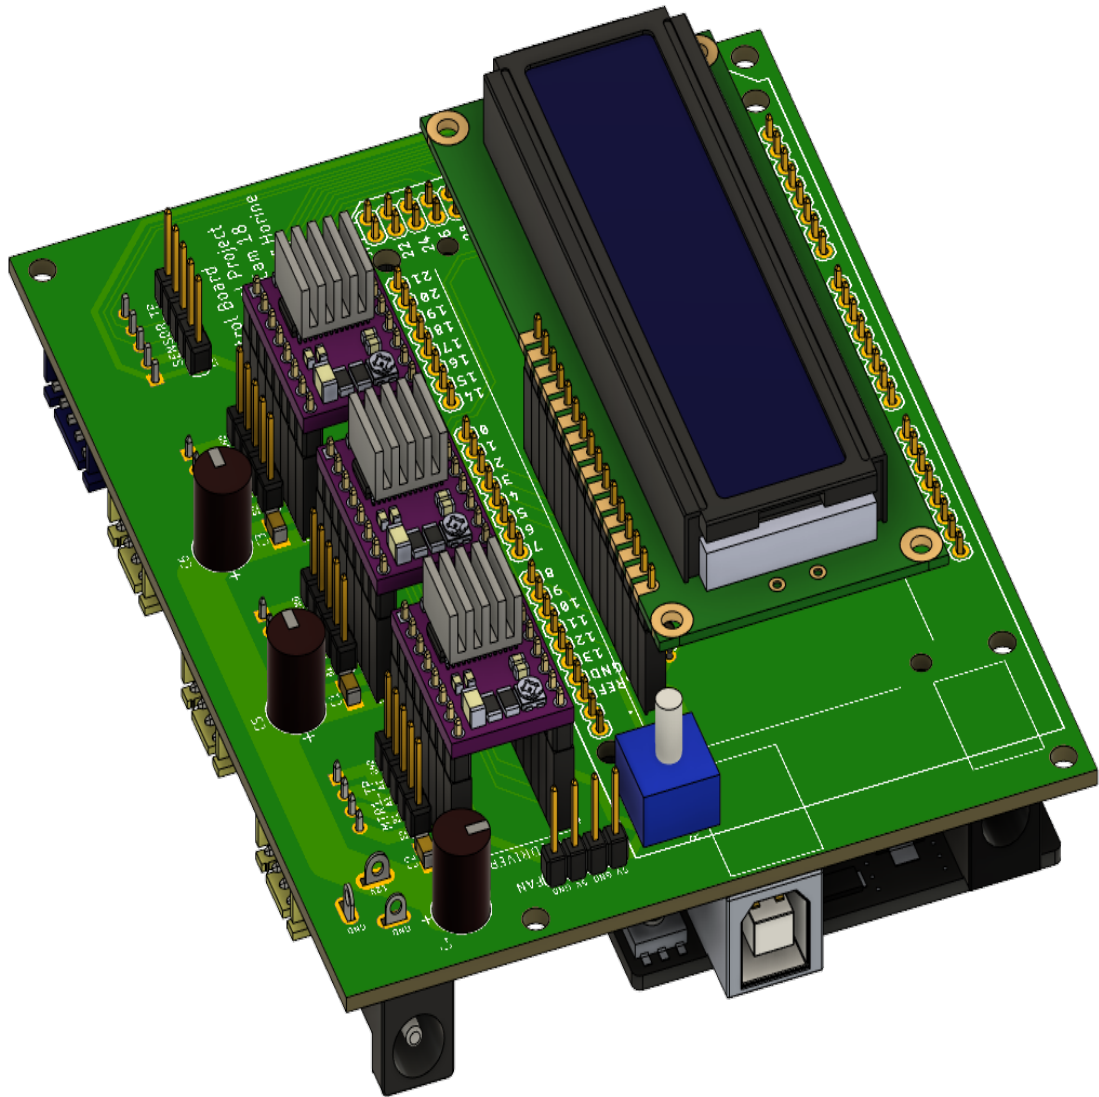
This is a rendering of the 3D model produced from the board designed with components added to give an idea of what the board will look like assembled. It will also be used to design the enclosure.
